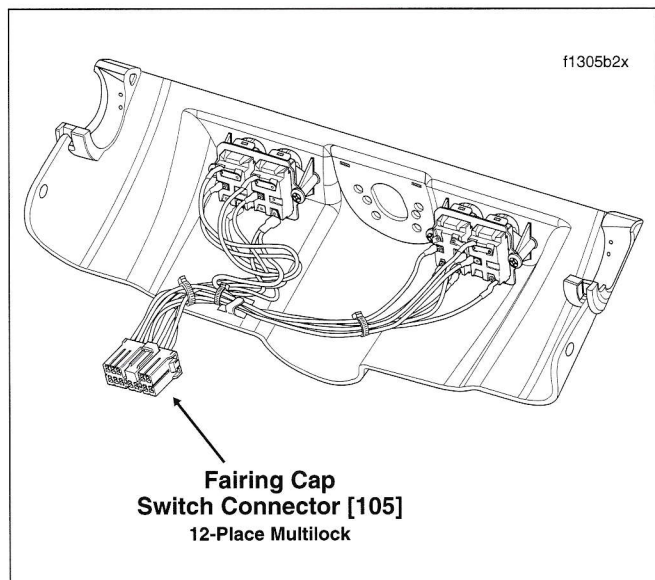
Fairing Cap Assembly (FLHT/C/U)
